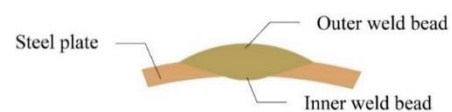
Typical shape of spiral weld seam cross-section of SWTs (as seen at tube ends)
